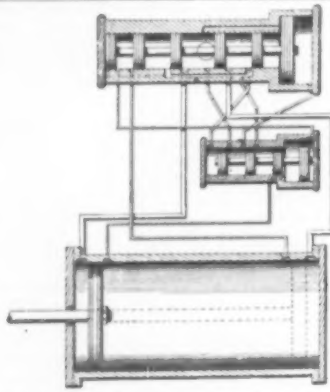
Automatic pressure-operated valve for pump engines, the invention of M. J. Johns
